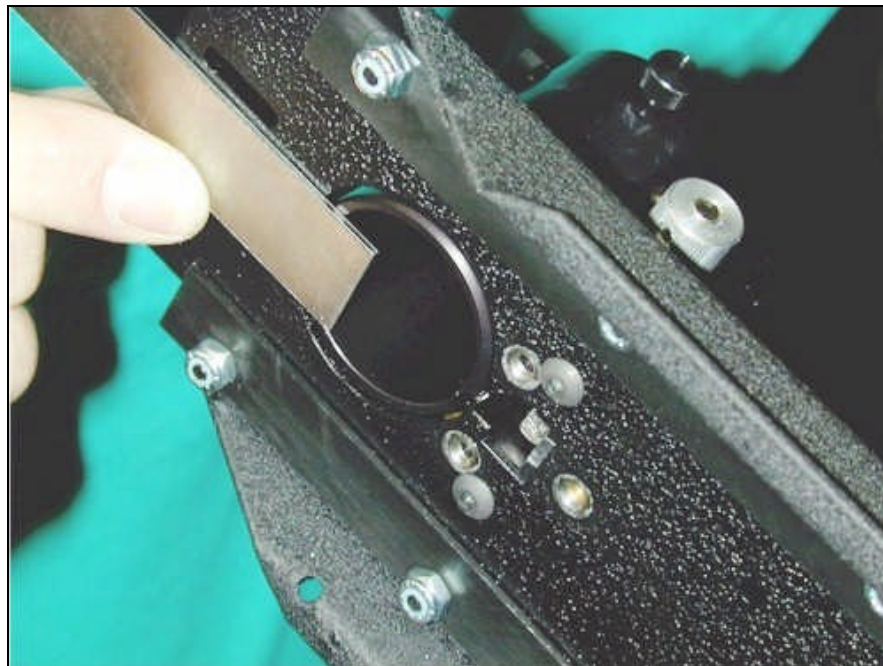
Inside View of Drawtube Bottom and Sliding Plate
